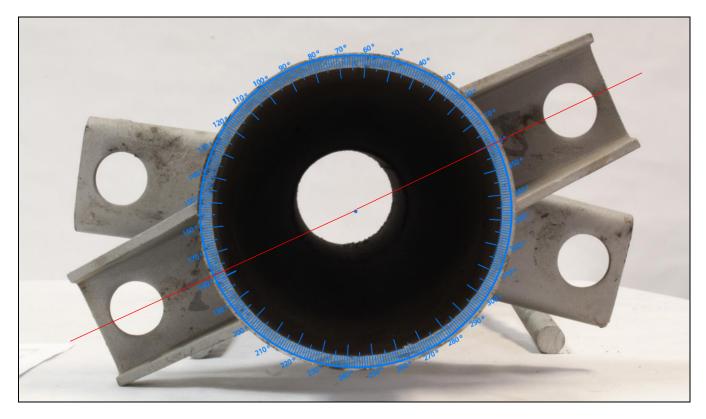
End facing image of the sample at End A with a superimposed protractor.
